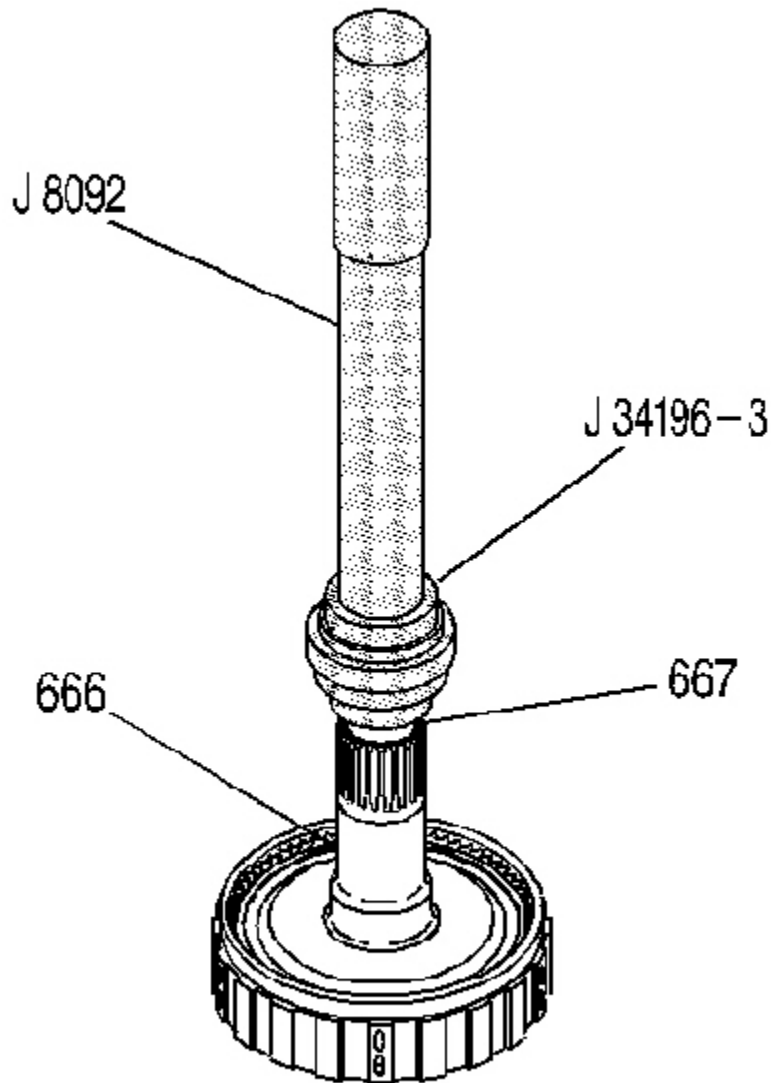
View Of Reaction Carrier Shaft Rear Bushing
